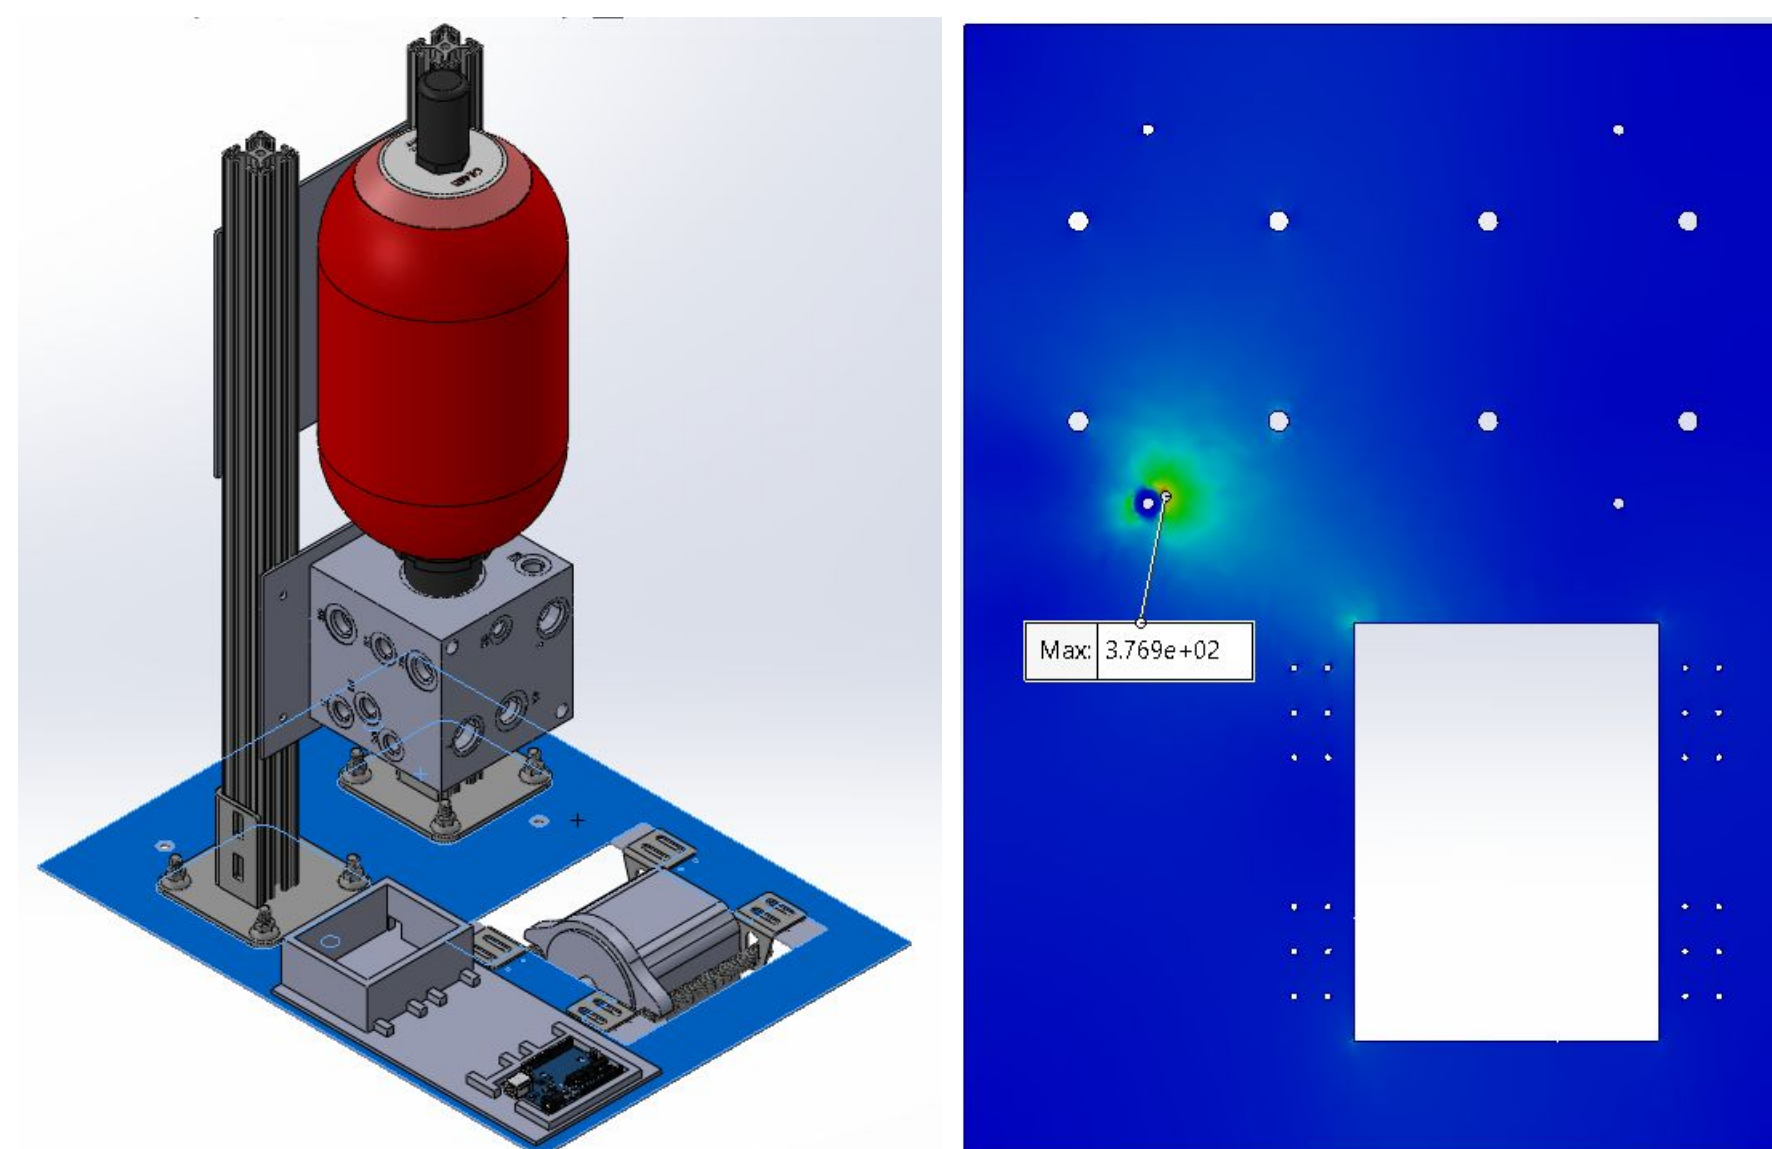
Component Mounting Configuration and Stress Analysis of Base Plate
